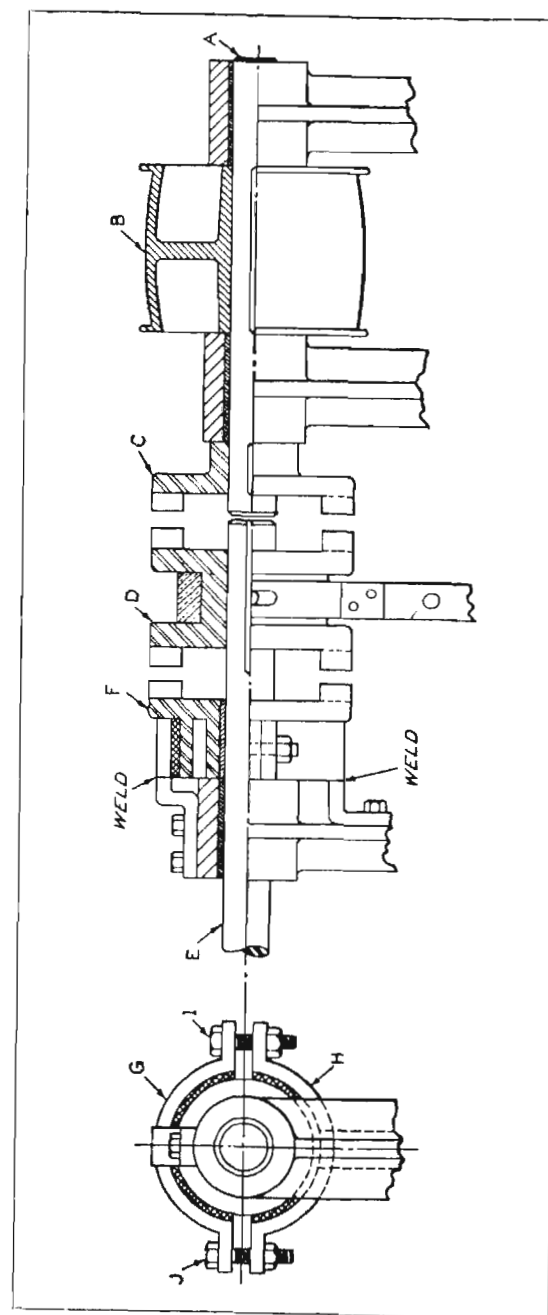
Clutch Arrangement for Disengaging Shaft E from the Driving Shaft A and then Applying Brake to Shaft E.
